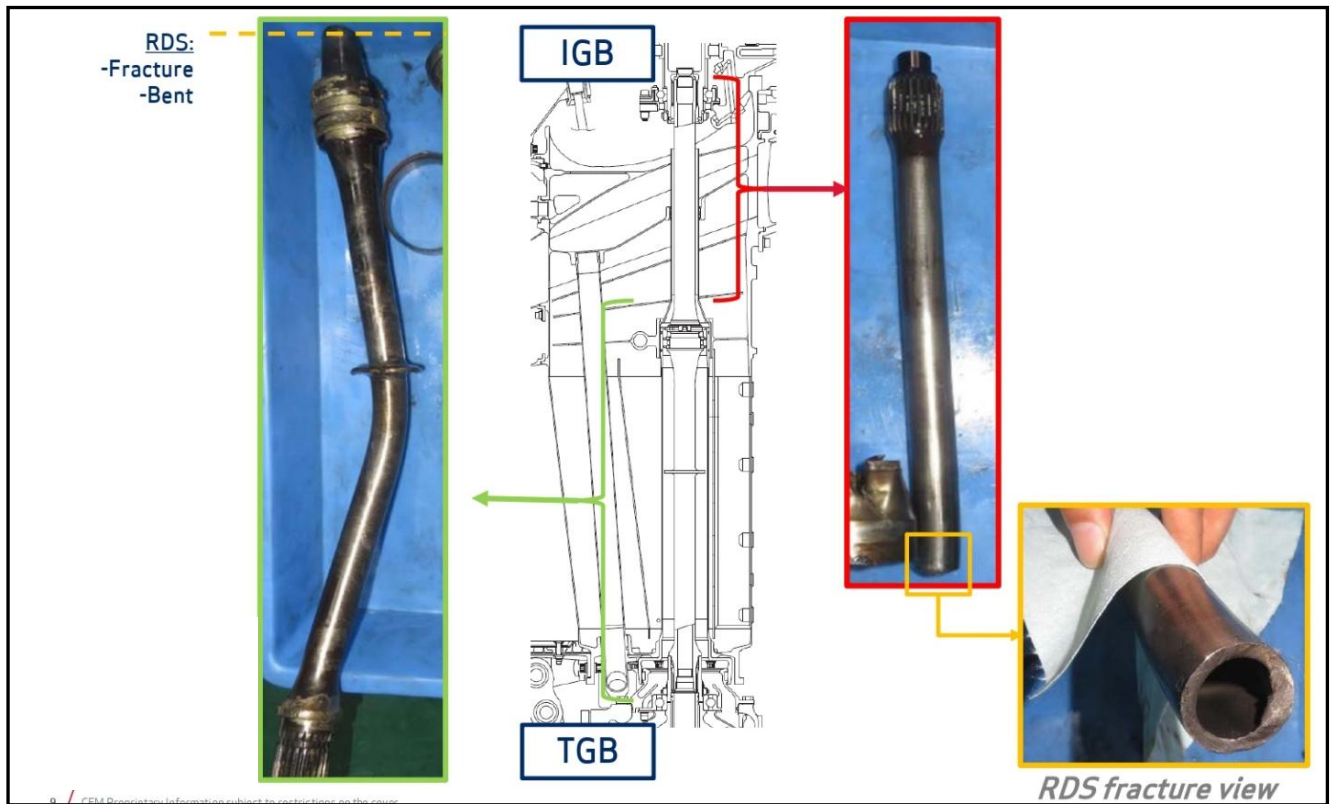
Inspection of radial shaft condition (Source: M/s CFM)
